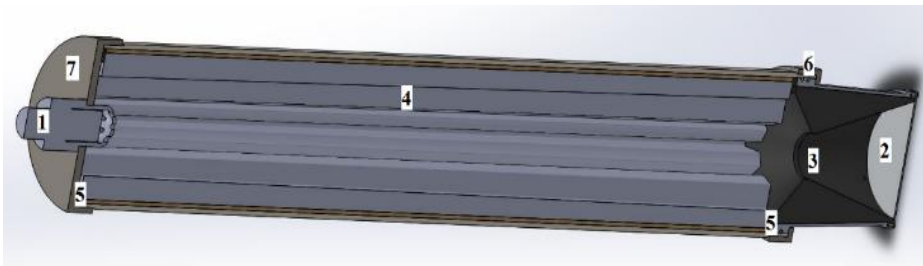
Rocket motor assembly: 1 – igniter; 2 – end cap; 3 – nozzle; 4 – propellant grain; 5 – hermetic rings; 6 – fixing ring; 7 – top cap
